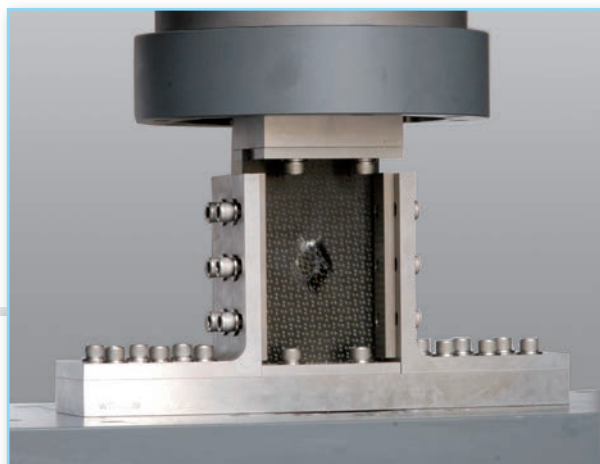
Predamaged specimen is compression-loaded until failure; standards distinguish between guided and gripped retention in the fixture
